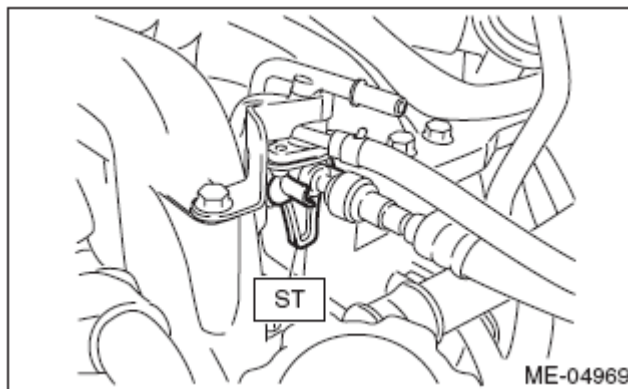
Disconnecting Fuel Return Hose Using Connector Remover
